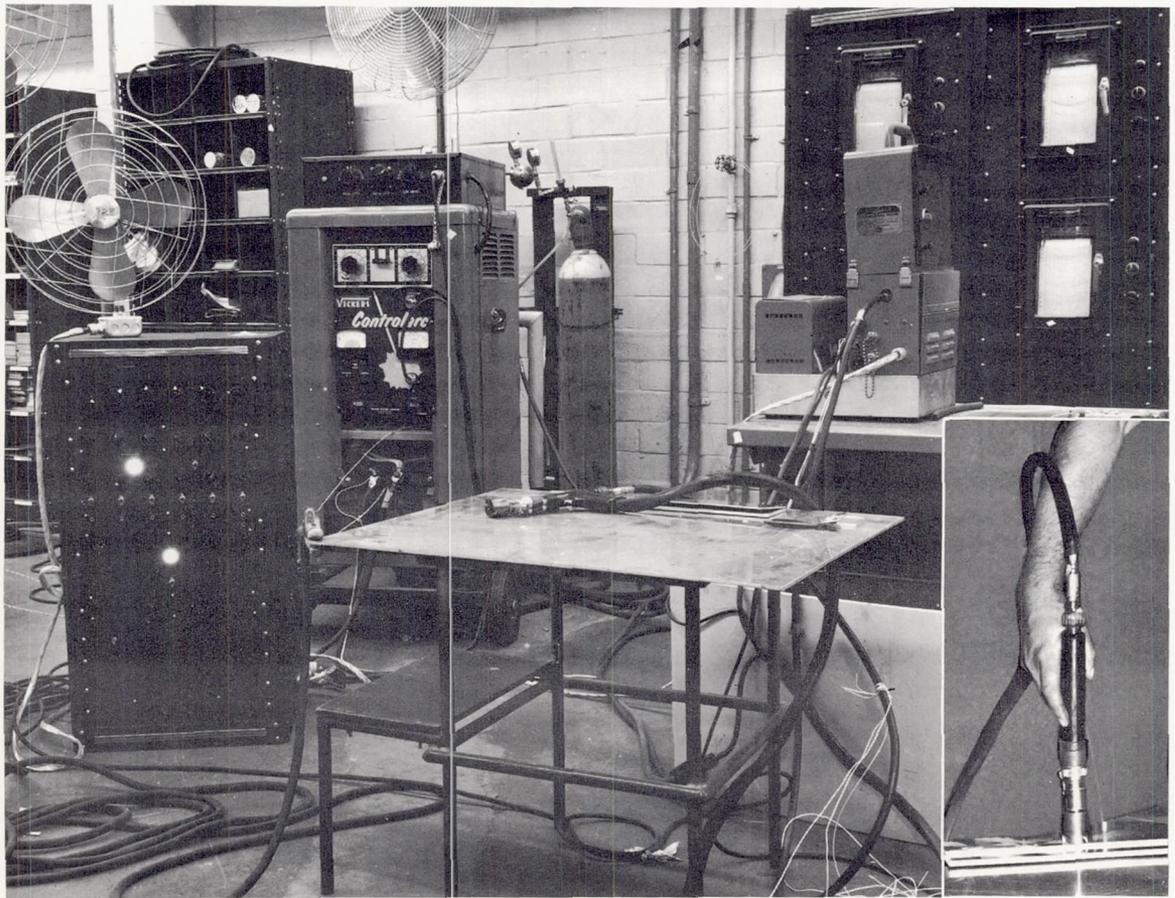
Conventional metal-inert-gas hand torch with slightly enlarged and vented nozzle, and associated equipment.
